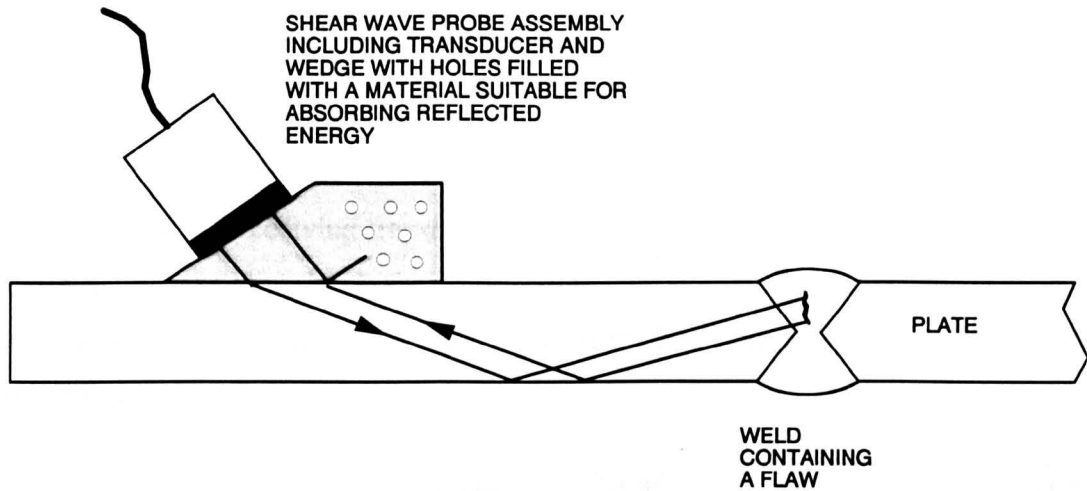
AN ANGLED TRANSDUCER IS USED TO PRODUCE SHEAR WAVES AND DETECT A FLAW IN A BUTT WELD
